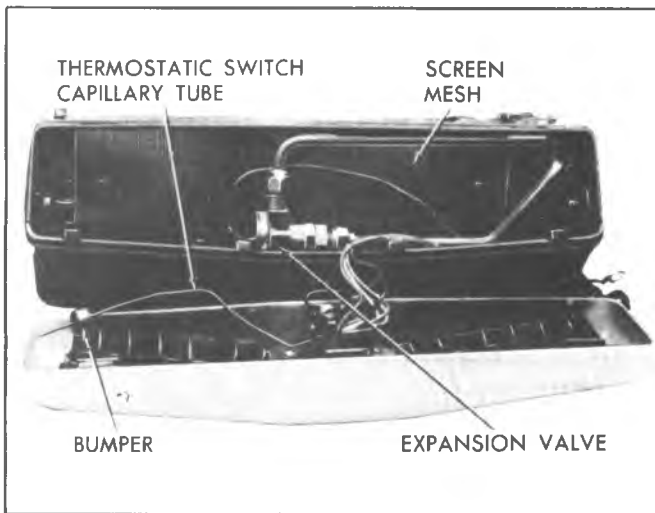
B-72--Expansion Valve (Motor Home Chassis Unit)
